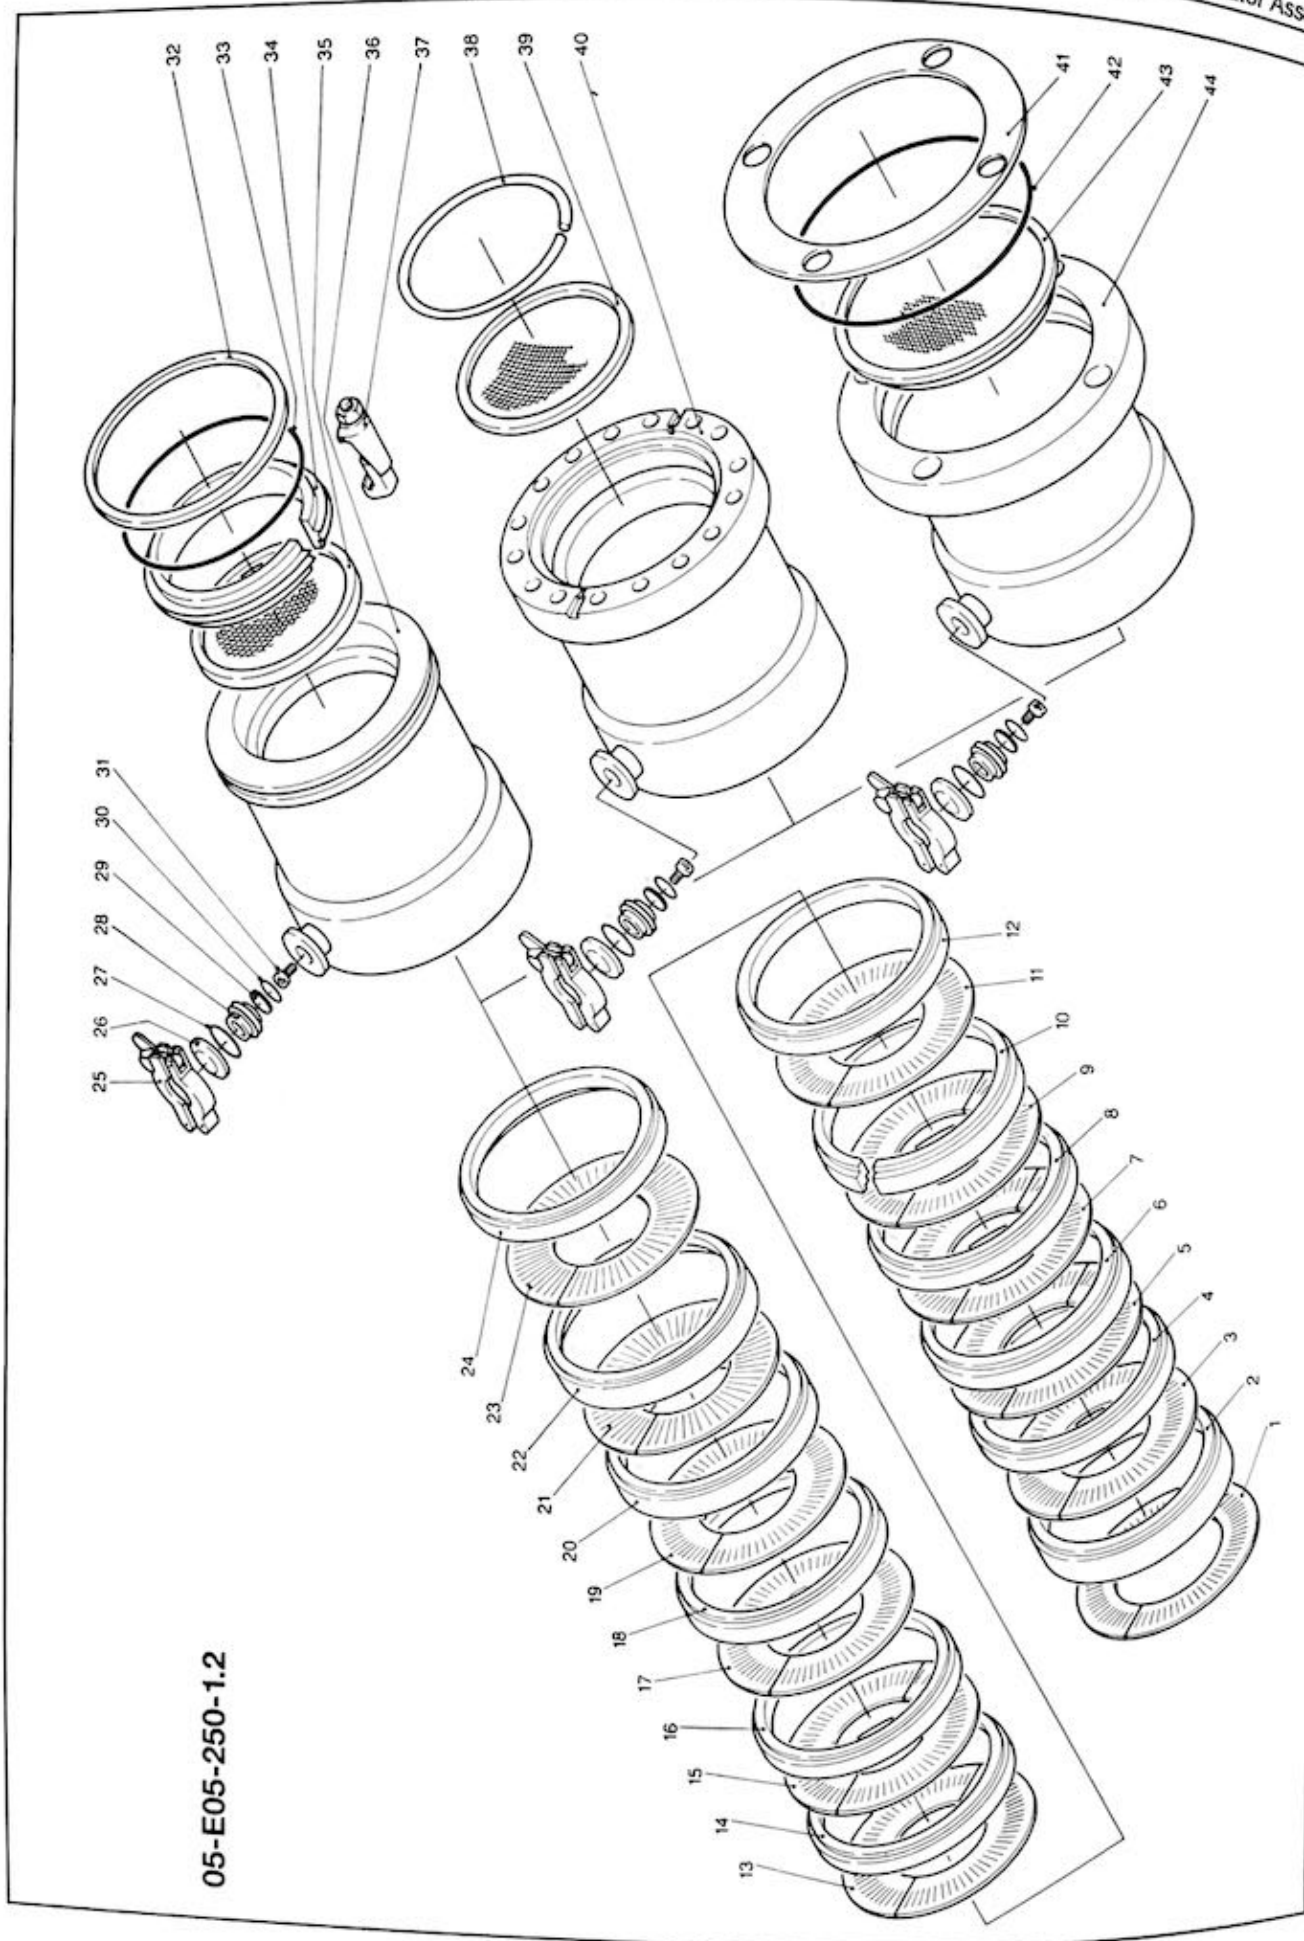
TMP151 C Housing and Stator Assembly (other models are similar)
